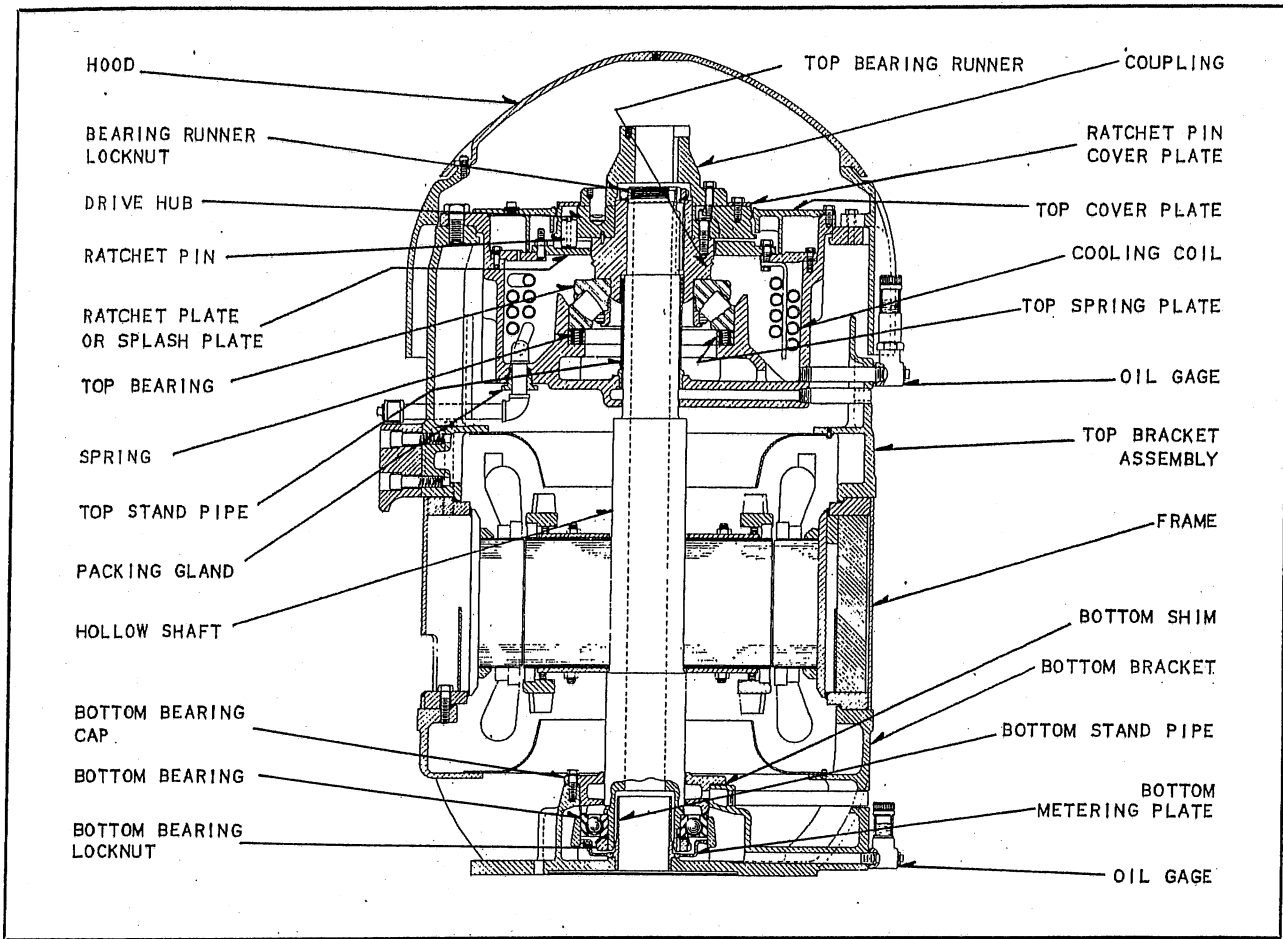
Frame 584 to 688.5 - Roller Bearing Construction (Hollow shaft illustrated but solid shaft motors have same construction except top coupling omitted).
